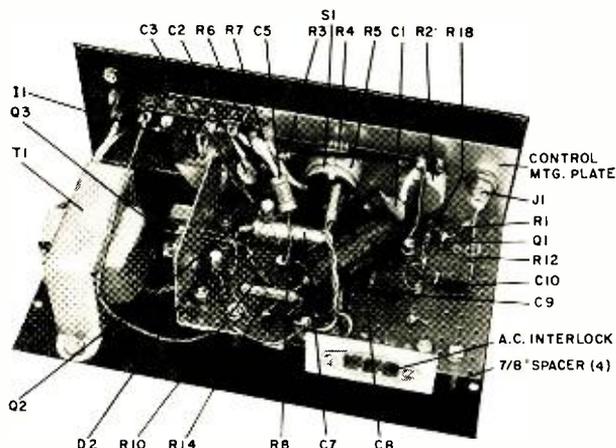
Components are mounted on both sides of circuit board to conserve space. Use metal spacers (as shown) to provide adequate clearance between parts mounted on underside of board and metal cabinet.
